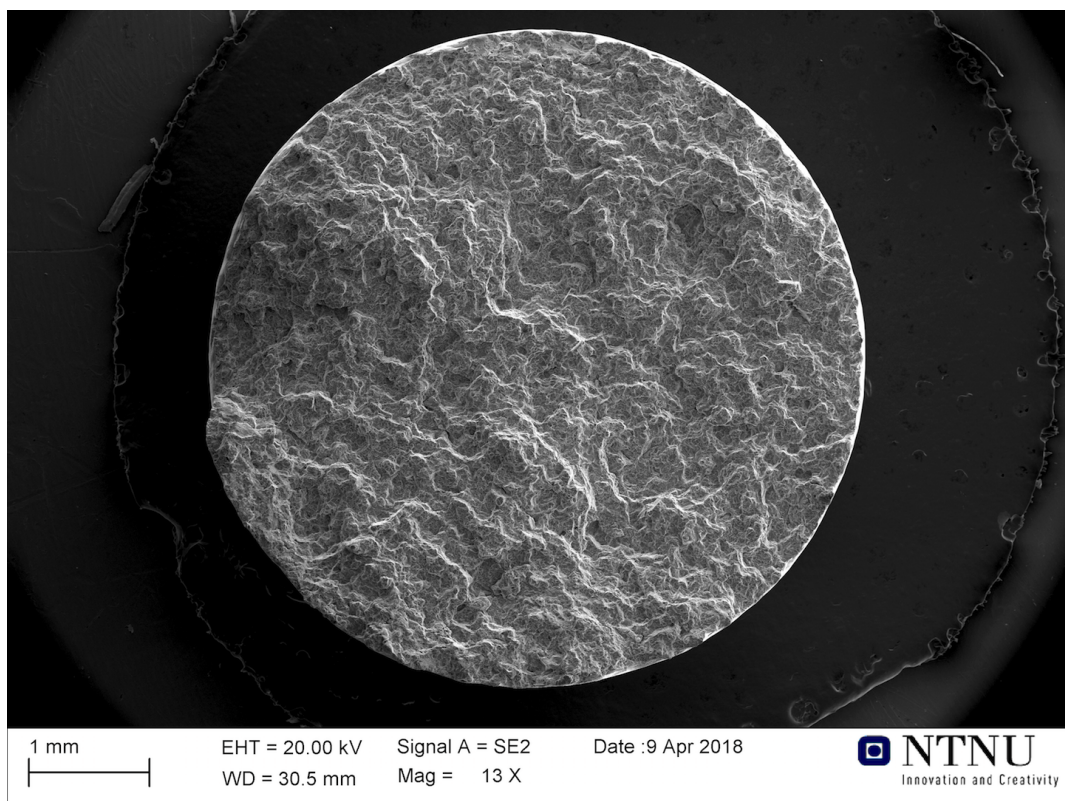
Overview of the fracture surface for the smooth specimen.
